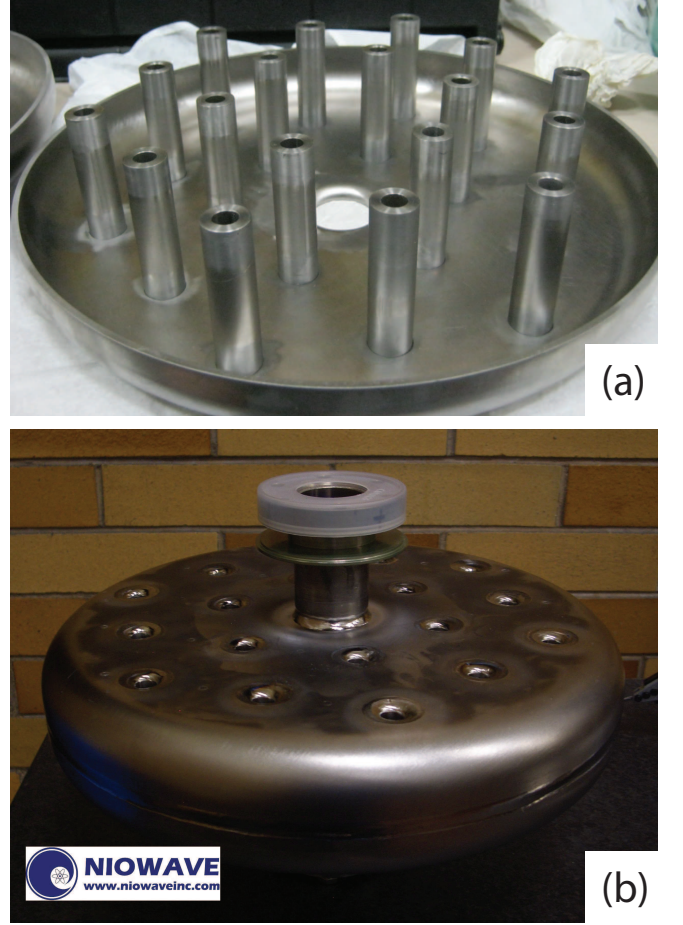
(a) Photograph of the components for the 2.1 GHz PBG cell fit prior to the electron beam welding. (b) Photograph of the final fabricated 2.1 GHz SRF PBG cell.
